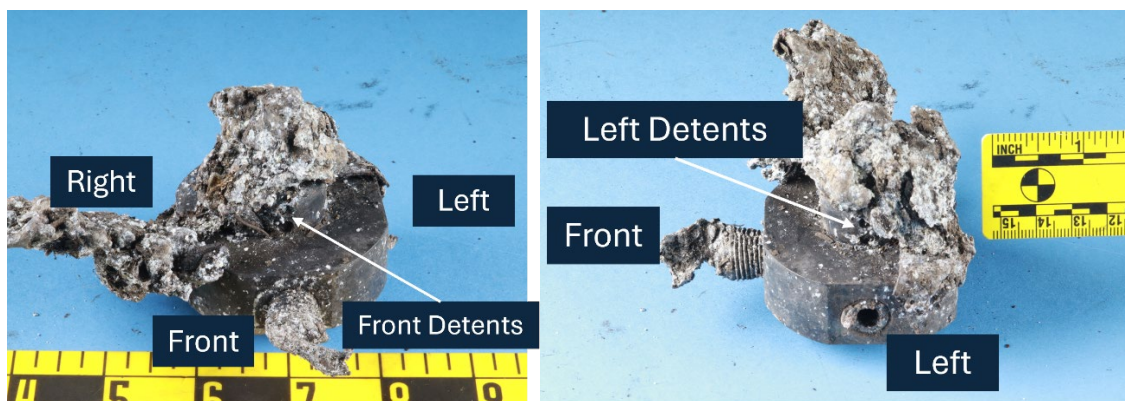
Melted and Re-solidified Pieces of Aluminum Attached to Valve Sections
